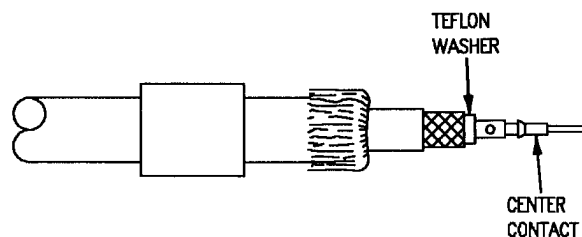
902-5020-2 Triaxial Assembly Procedures (Sheet 1)
